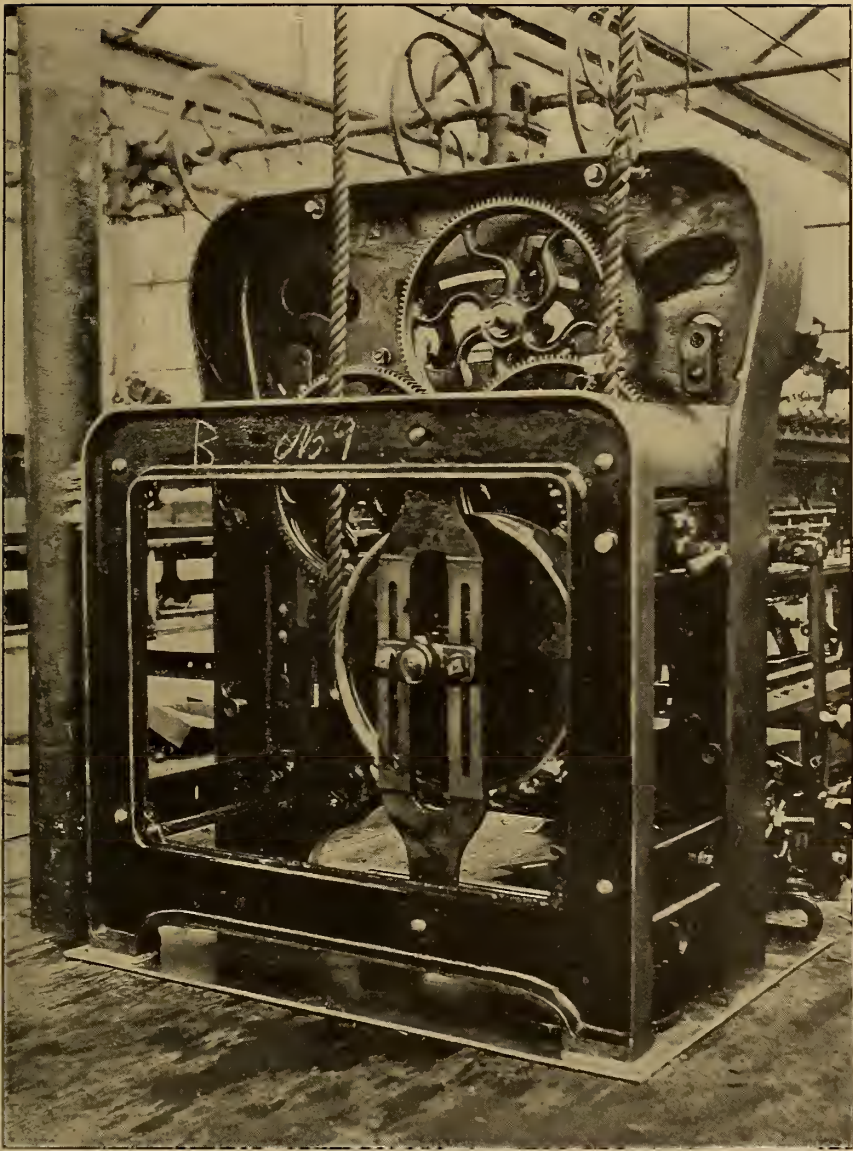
HEADSTOCK OF RING FRAME WITHOUT GUARDS
